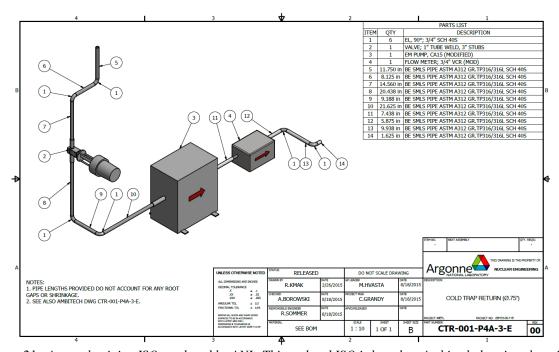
A sample piping ISO produced by ANL. This updated ISO is based on Ambitech drawings but gives Central Shops the required dimensions of the piping and equipment prior to installation.
